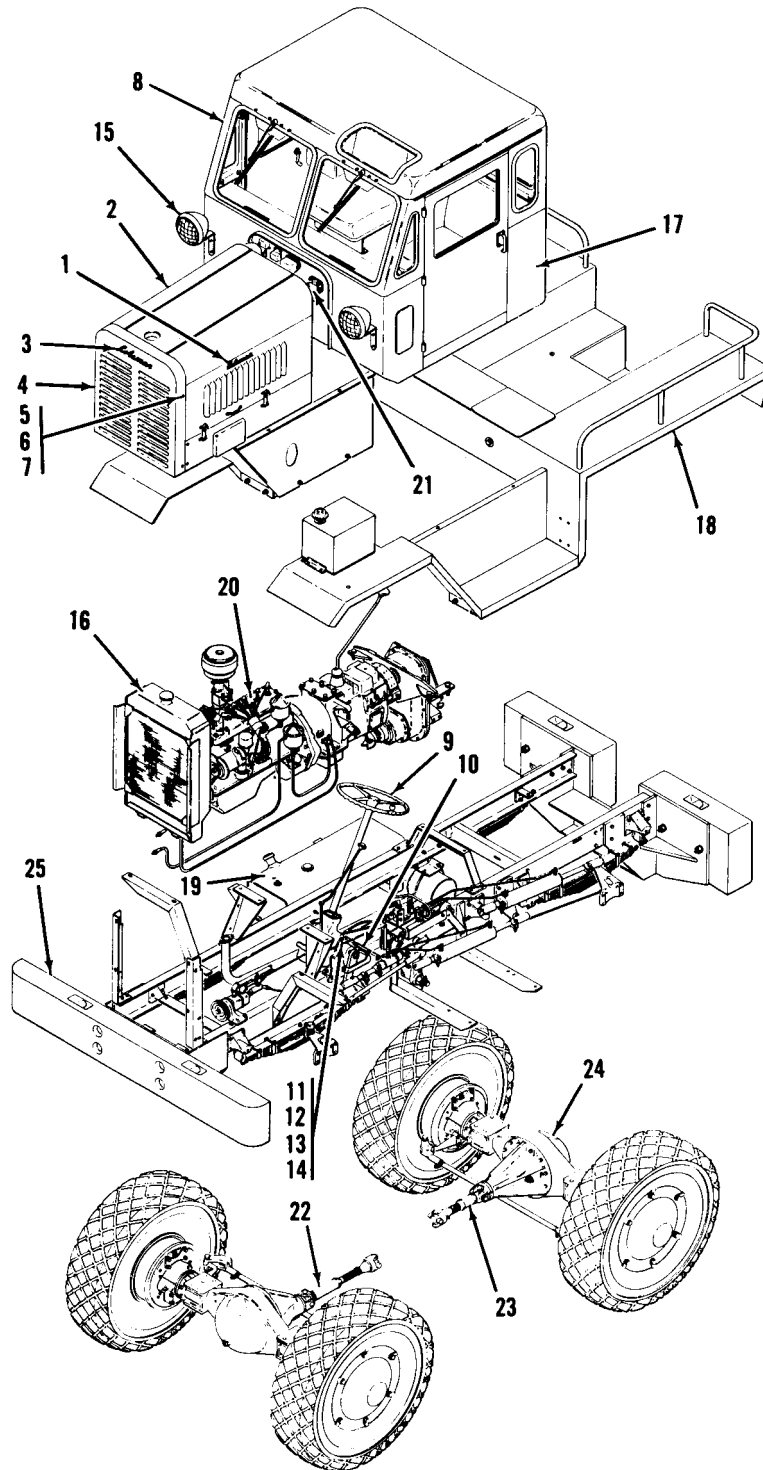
Towing tractor - exploded view (Sheet 2 of 2)
